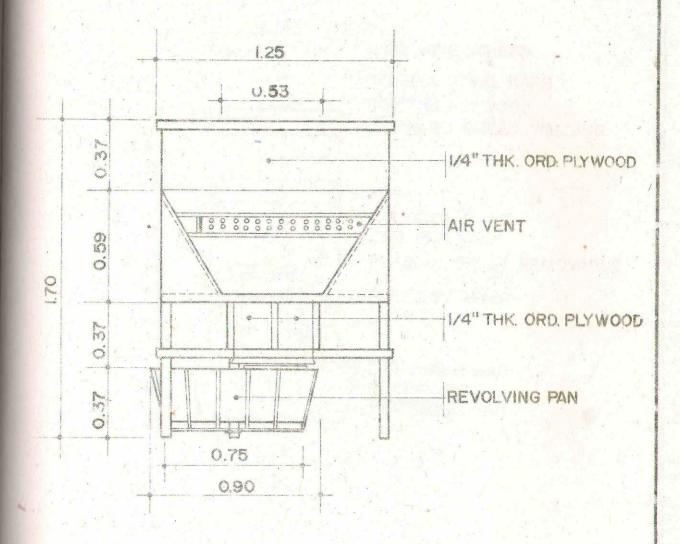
REAR SIDE ELEVATION Scale: 1:20 meter
